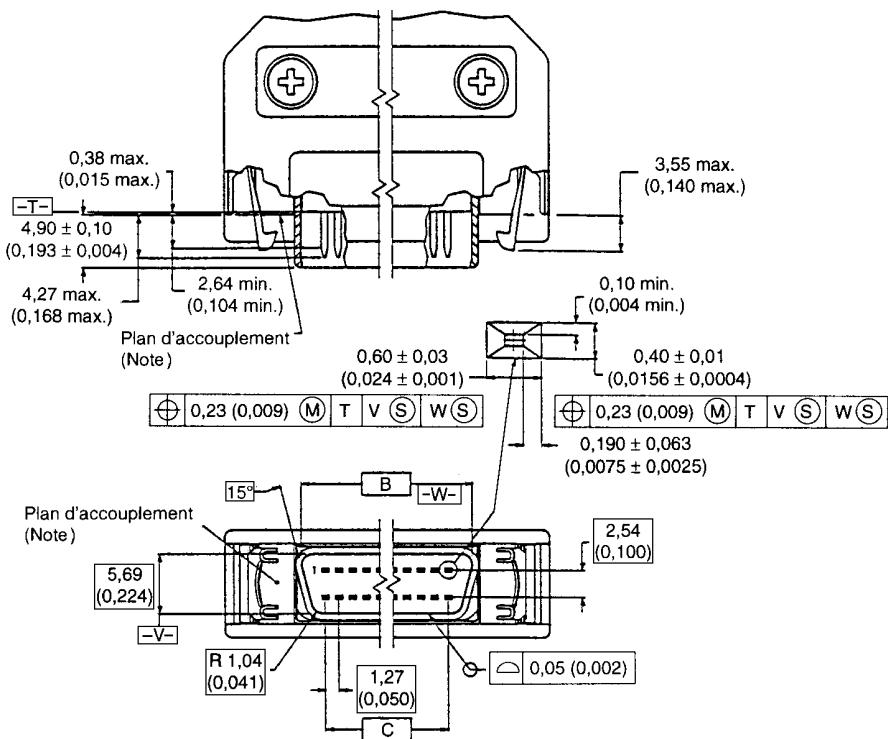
Right-angle fixed connectors with board locks – Styles F, H, J and L
